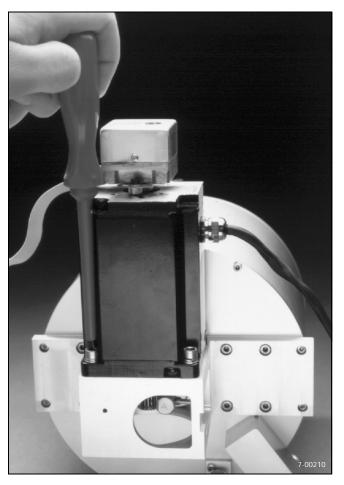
Gear mesh procedure: Tightening screws to slightly compress spring washers
